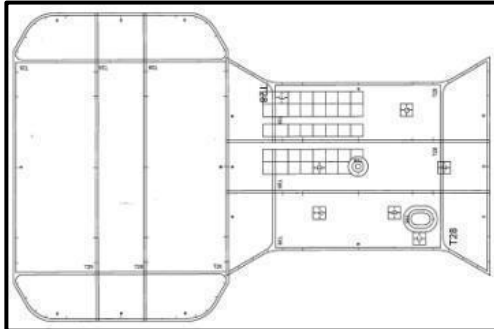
Tank 29 Measurement Panel Layout
